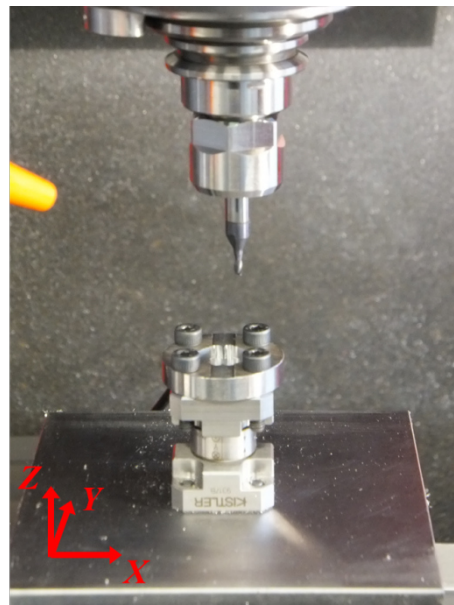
Workpiece mounted on the Kistler 9317B load cell.
